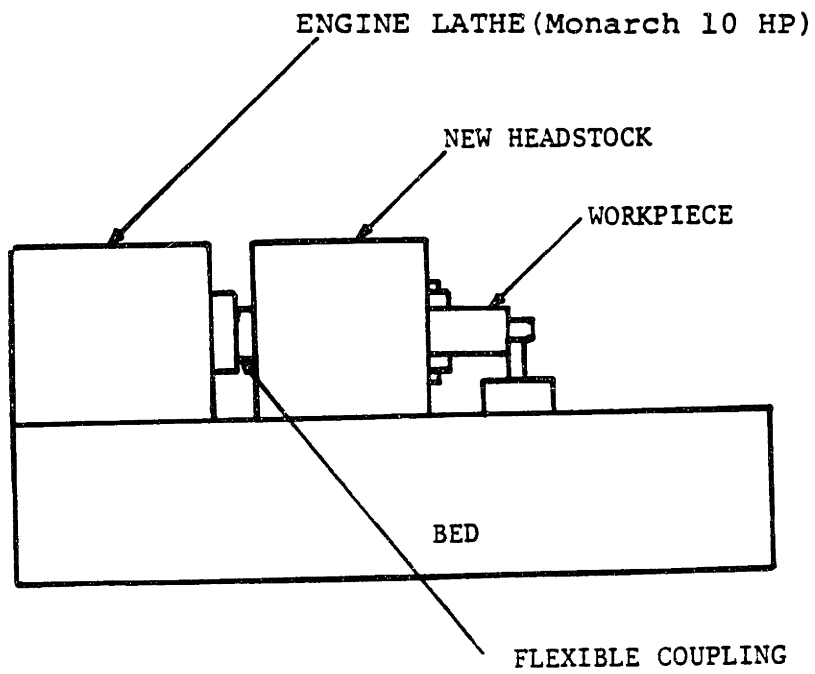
Experimental Set-up for the Metal Cutting Test of the Manufactured Spindle Bearing Systems
